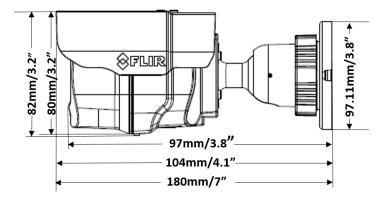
CB-3102-01-I Fixed Focal Side Dimensions
